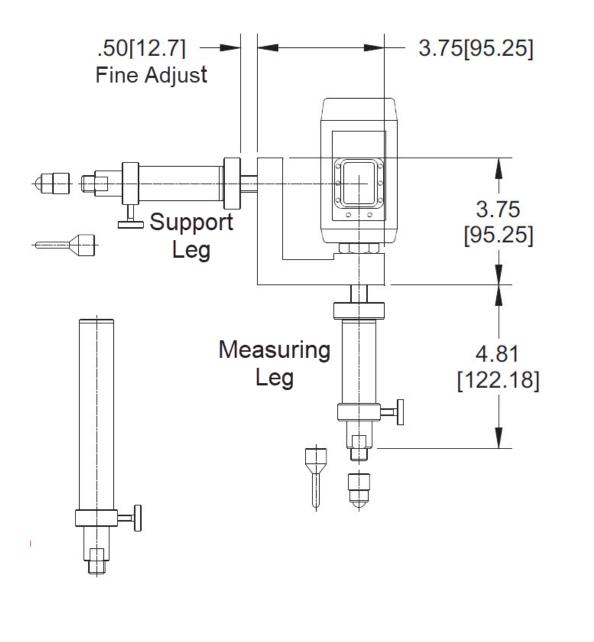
A-1511 Wand Bore Fixture & A-1519-2.4XBE-2X Target
